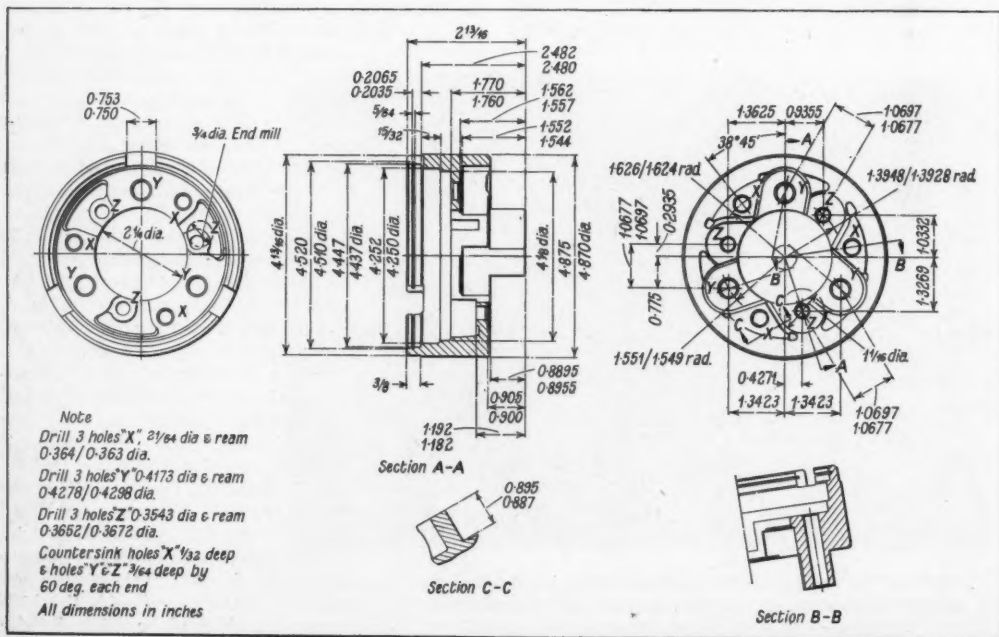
(below). Views of the rear drum component of the pinion carrier assembly, which has nine holes in similar positions to those in the cover, for the rivets and pinion shafts
